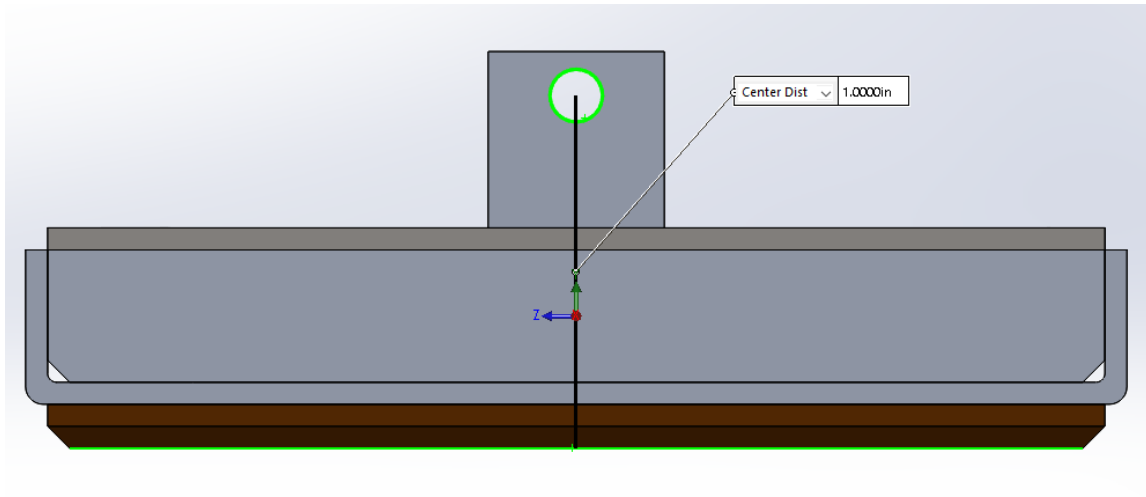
SolidWorks Assembly of Pivot Block with Shoulder Bolts and Bearings
